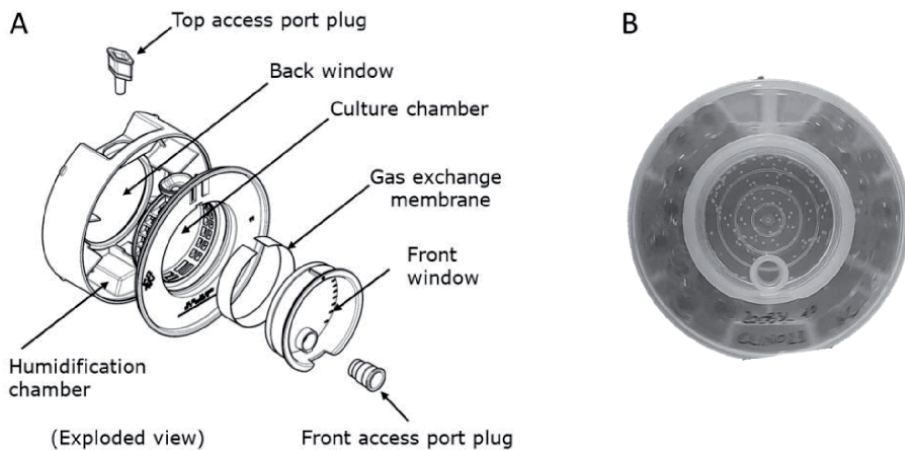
A culture vessel designed to provide easy access to the culture chamber. (A) Exploded view of parts. (B) Front view showing spheroids in the culture chamber (white spots).
